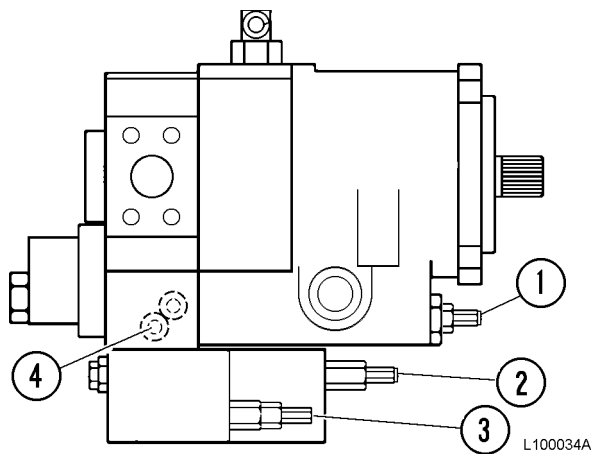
STEERING/BRAKE PUMP ADJUSTMENTS
